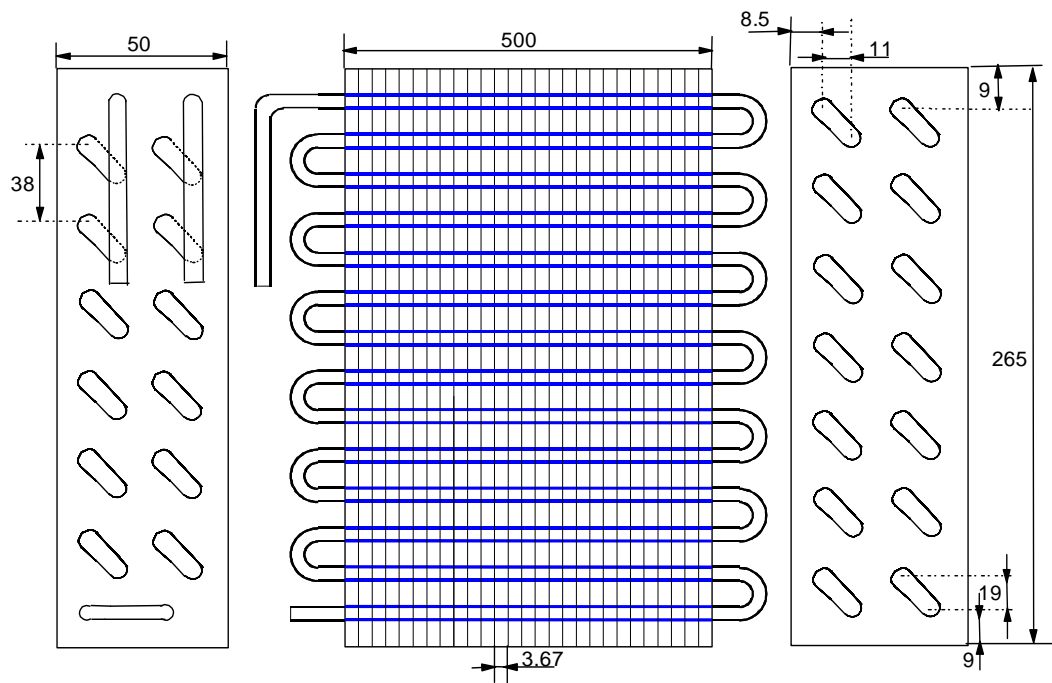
Schematic of the heat exchanger for gas cooler and intercooler
